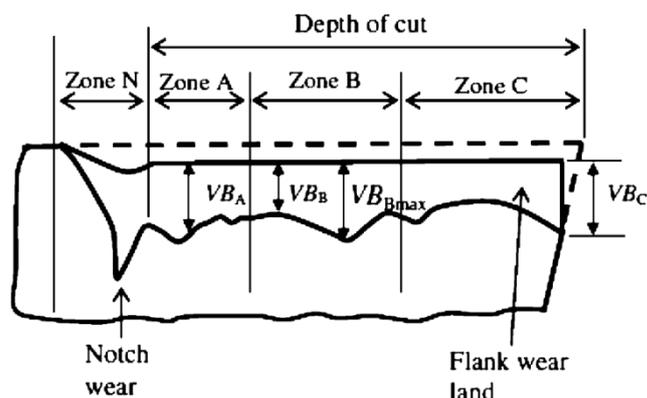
Side view of cutting tool showing flank wear (ISO3685)
